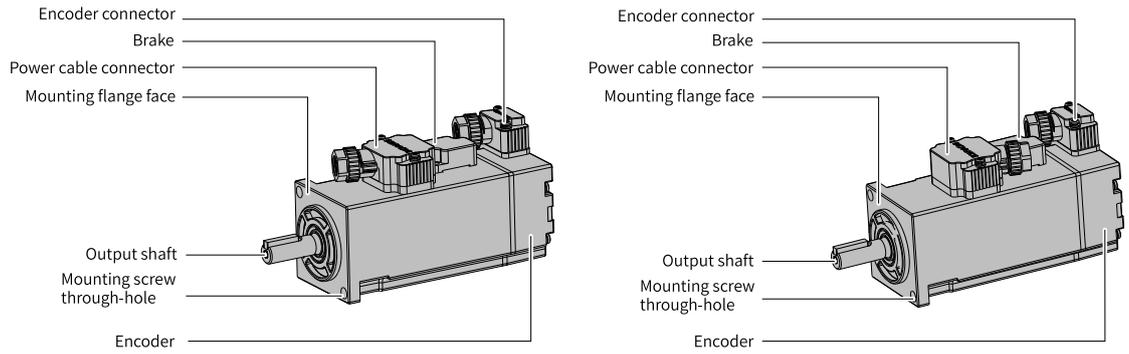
Components of a terminal-type servo motor (Left: motor with front cable outlet; Right: motor with rear cable outlet)
